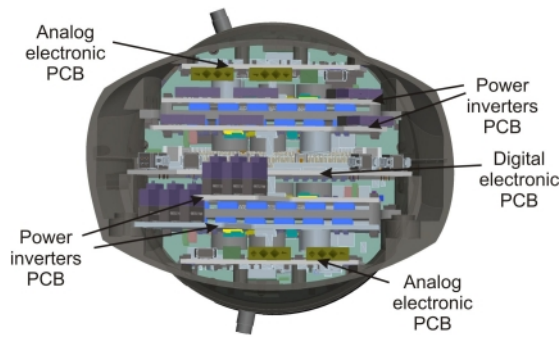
PCB placement in the hand base (view from palm to wrist)
